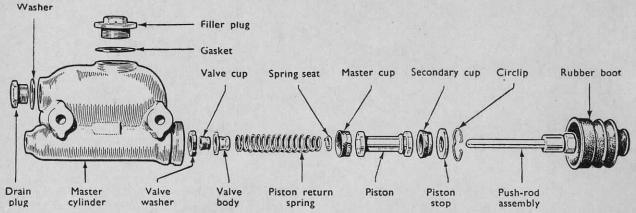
The component parts of the master cylinder. Later models have a thin protecting copper washer between the end of the piston and the master cup.
